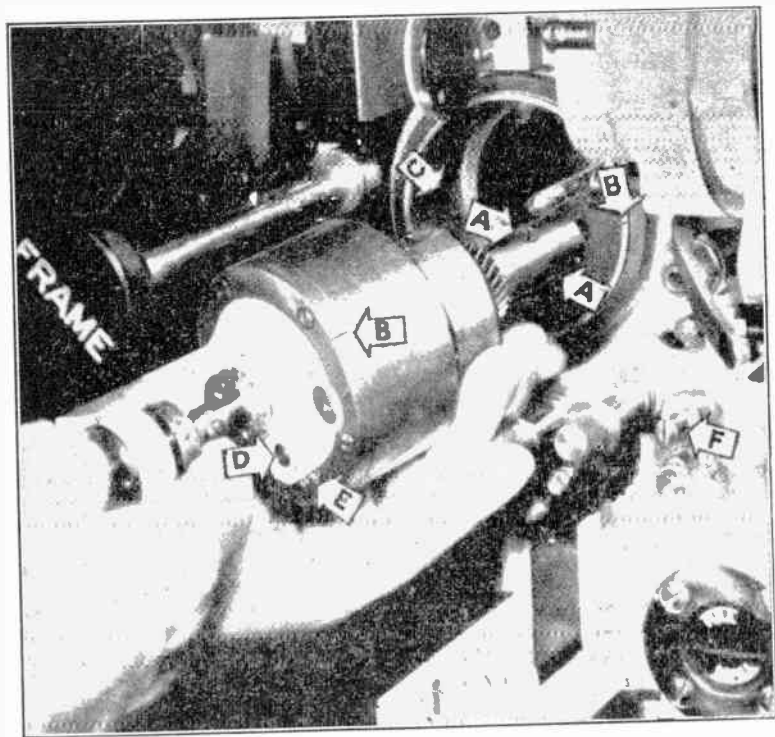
Simplex projector mechanism. In the figure A, represents flywheel gear fastening screw; B, intermittent guide lines; C, synchronizing cam; D, cam end play adjustment stud; E, cam end play adjusting locking screw; F, lower sprocket pad roller arm stud and fastening screw.
